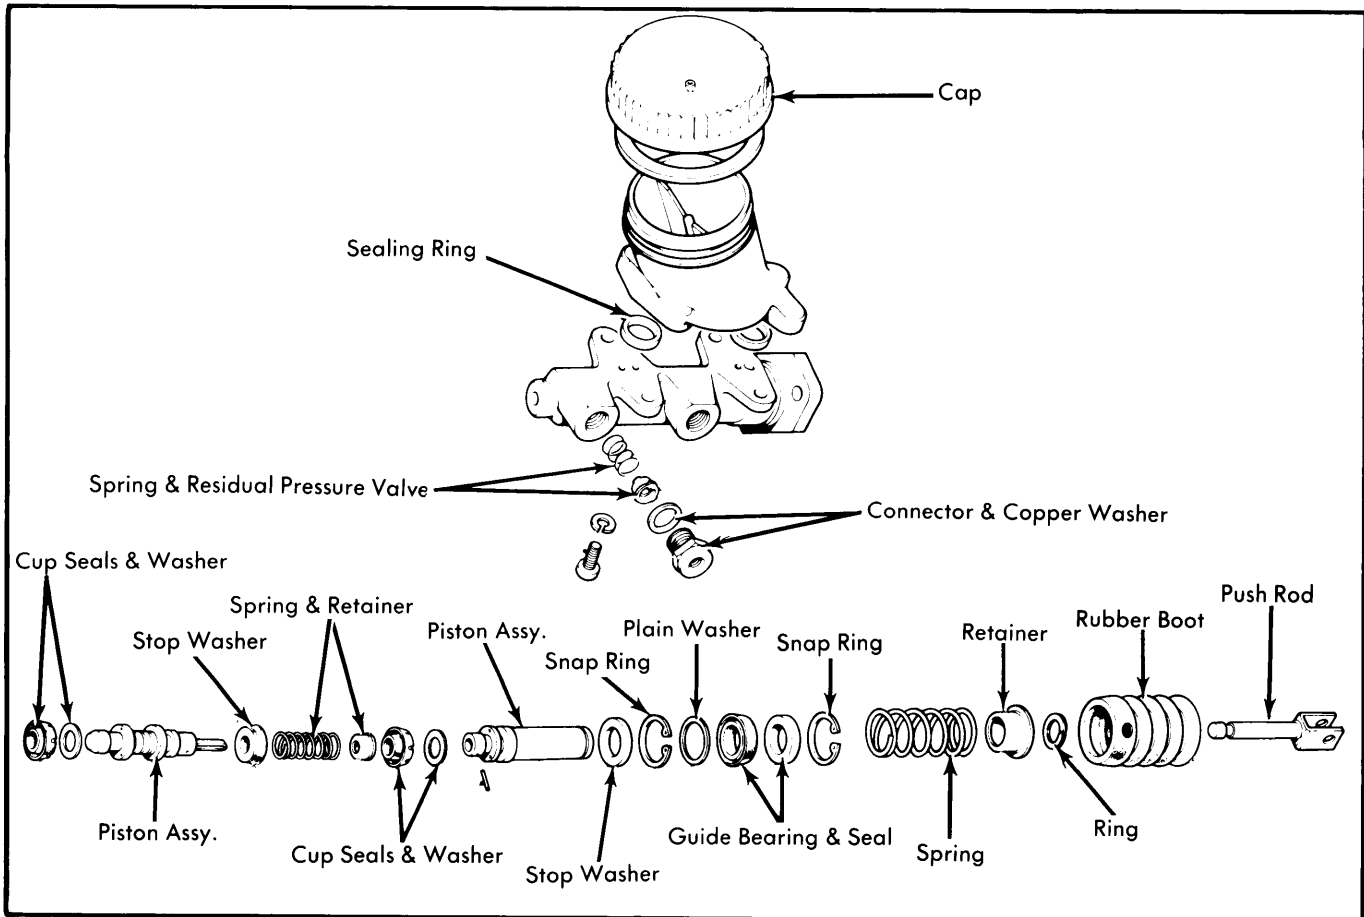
Exploded View of Master Cylinder Reservoir, Body and Piston Assemblies
